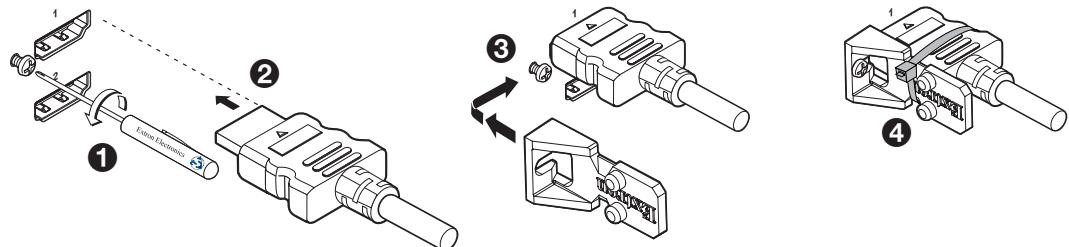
LockIt Cable Lacing Bracket Mounting Instructions
